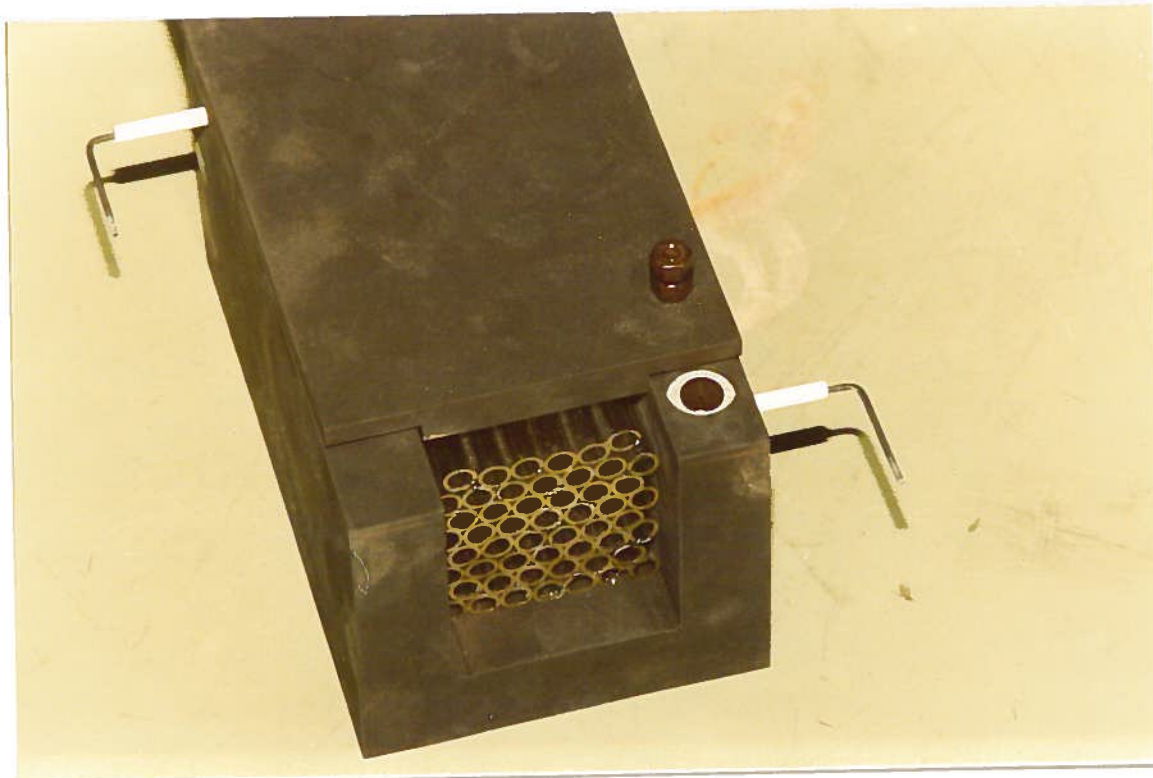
Graphite mold with its sensors: a $5 \times 5 \text{ cm}^2$ CALTUB prototype is inside the mold.
